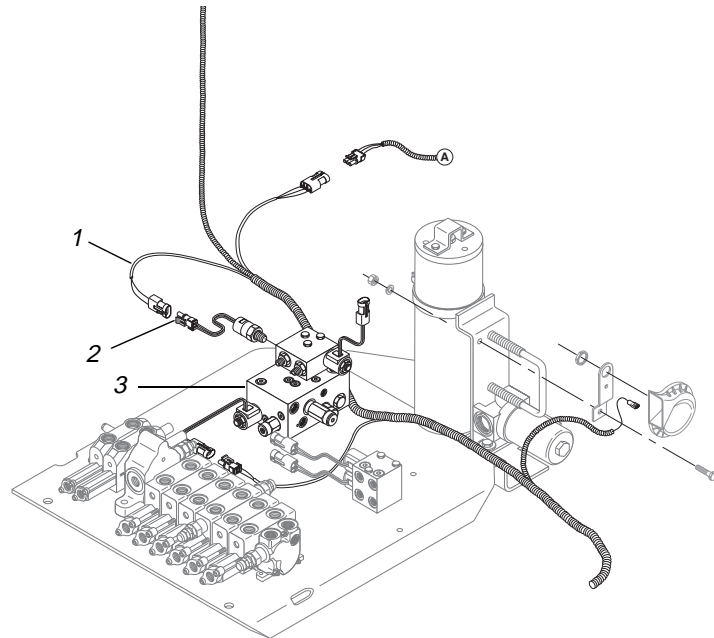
Service Brake Pedal Pressure Switch – Control Manifold Hydraulics
